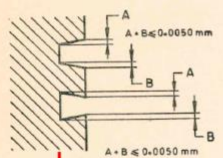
PARALLEL SIDED RING GROOVE PARALLELISM
